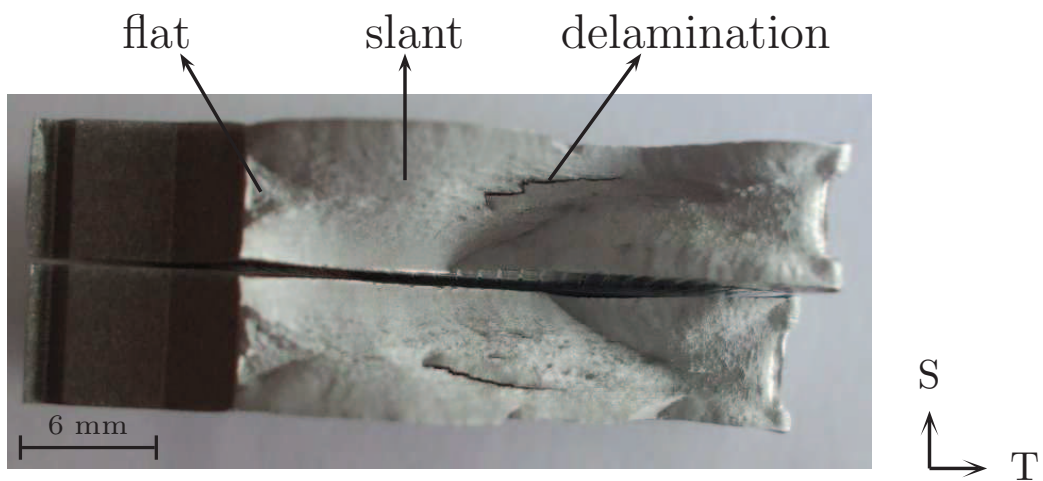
Macroscopic fracture surface of T8 fibrous (T8F₆) Kahn specimens tested along L-T orientation.
